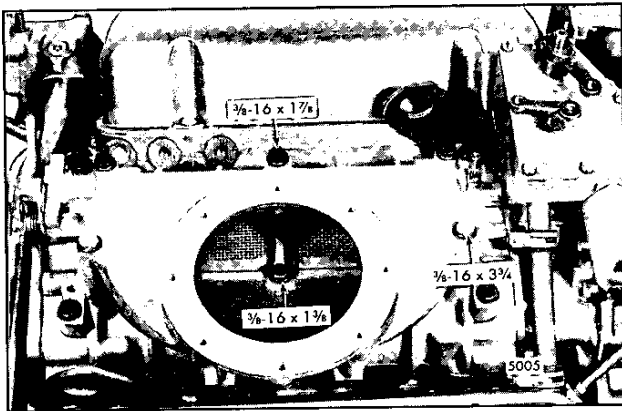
Location of Air Shutdown Housing Mounting Bolts (6V Engines)
